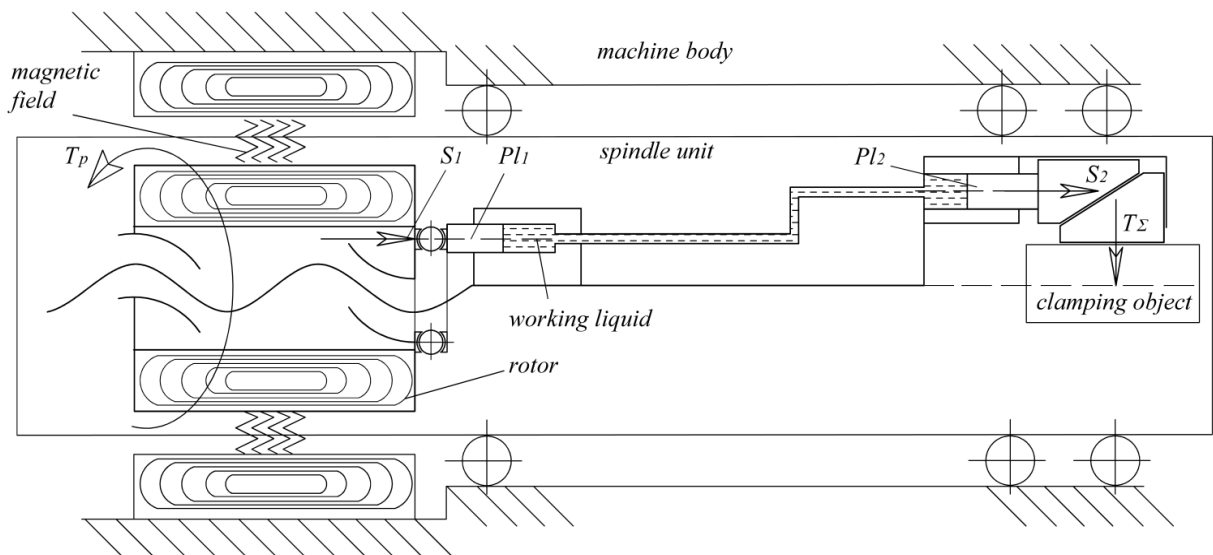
Scheme of the proposed clamping mechanism with electromechanical drive and hydraulic amplification system
